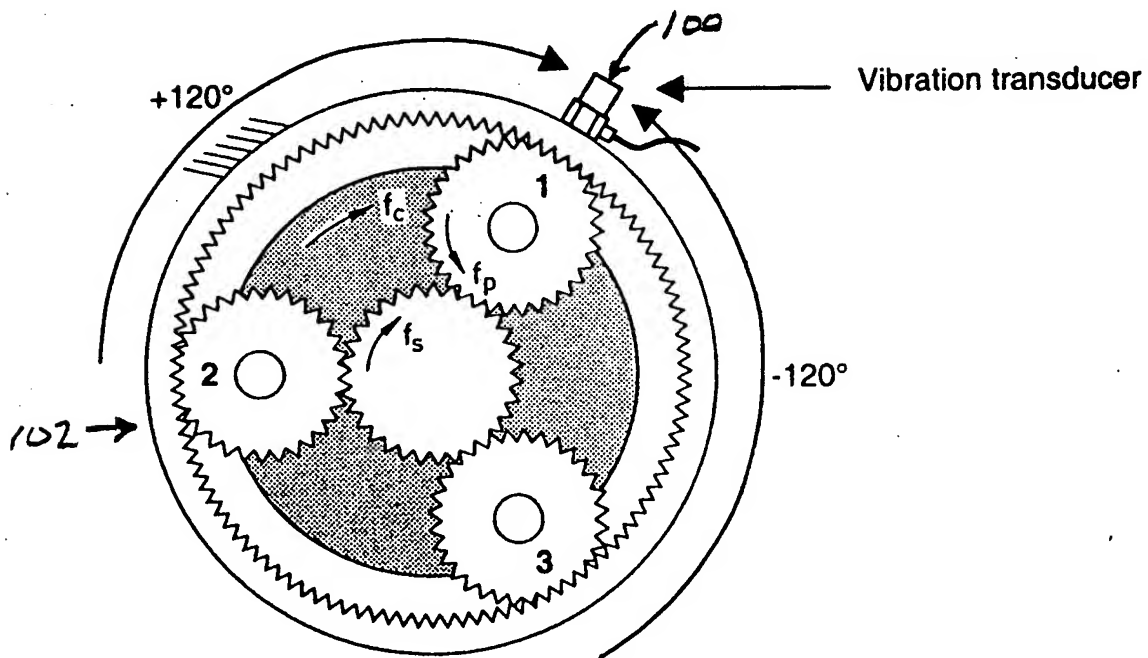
Phase shifts required to align the separated sun gear averages in a three-planet gear train.
